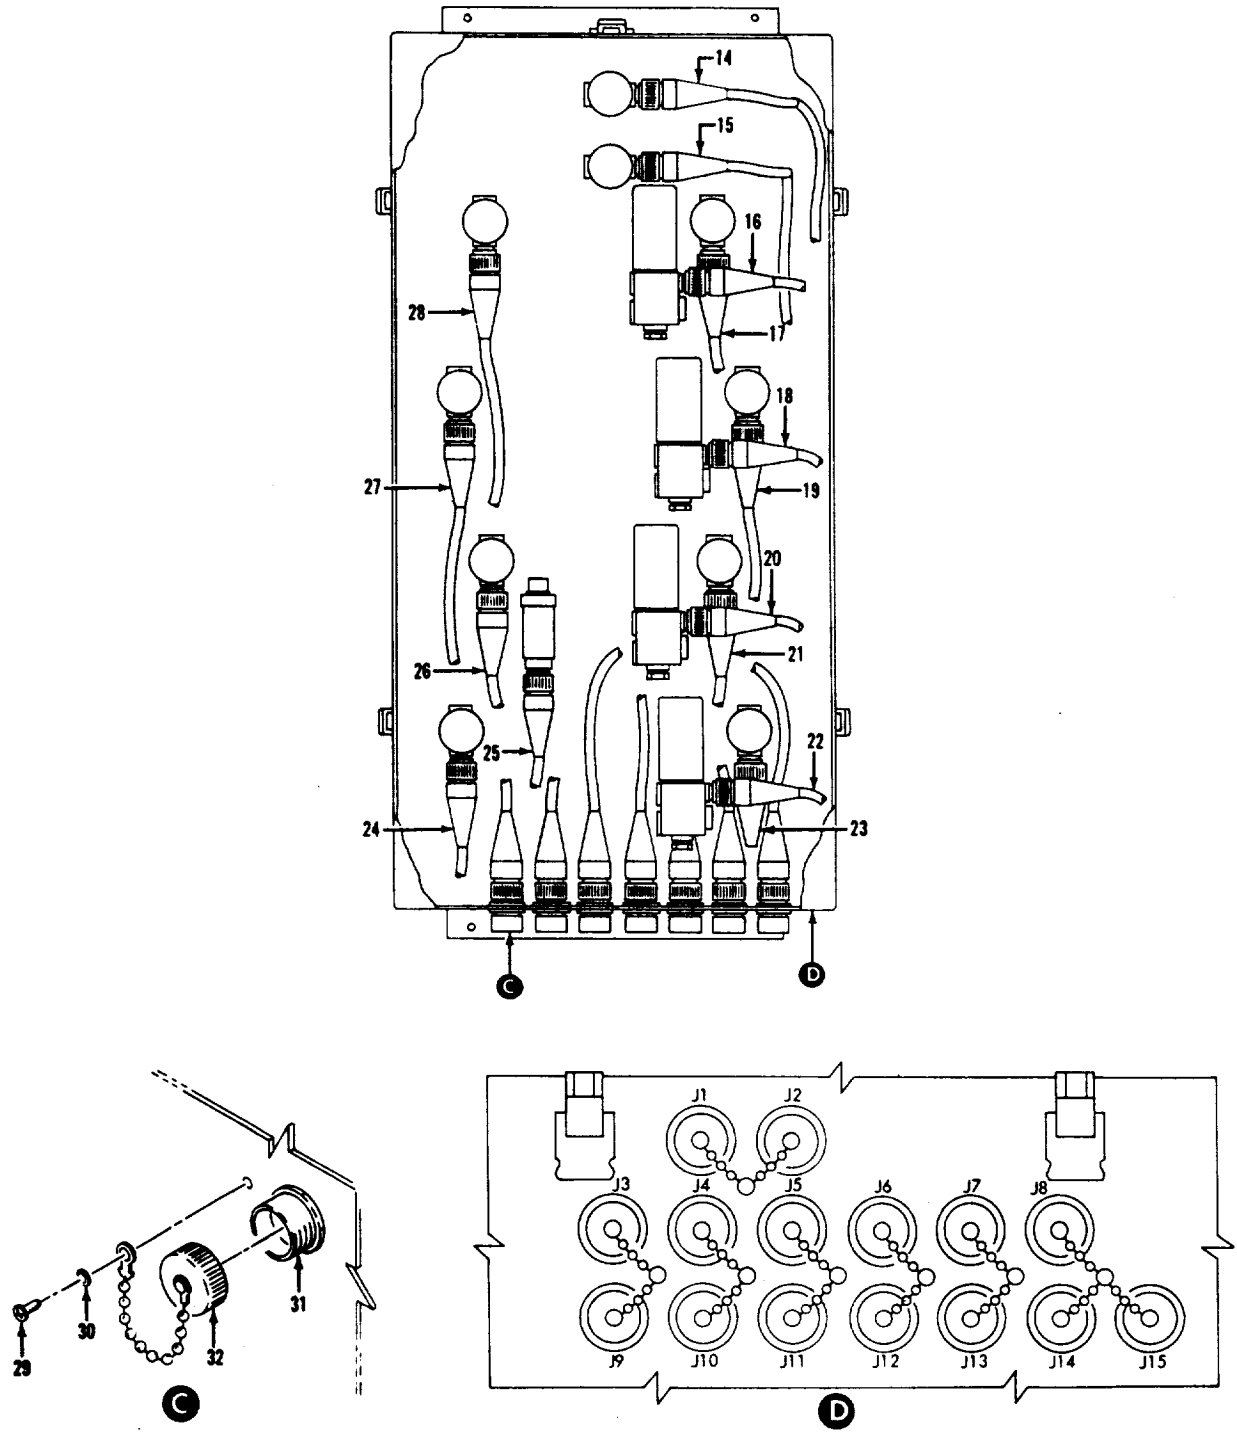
Pneumatic Box Assembly (Sheet 2 of 7)
